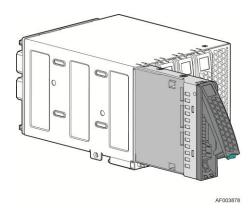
4x3.5" Hot-Swap Hard Disk Drive Cage
